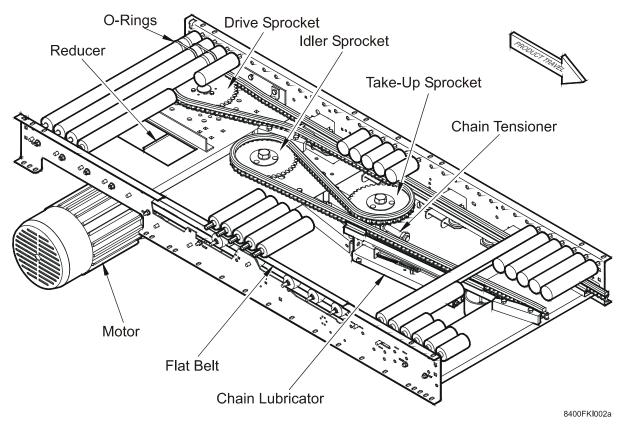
Accuglide Infeed Drive Section (LH Assembly Shown)
